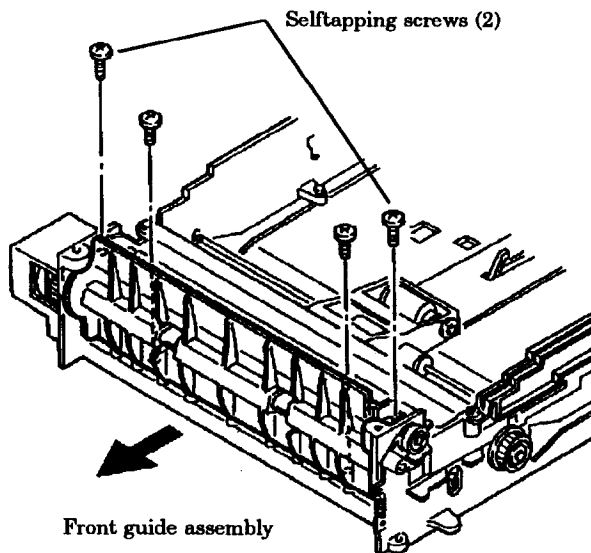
REMOVING SCREWS FROM THE ADJUSTER ASSEMBLY
